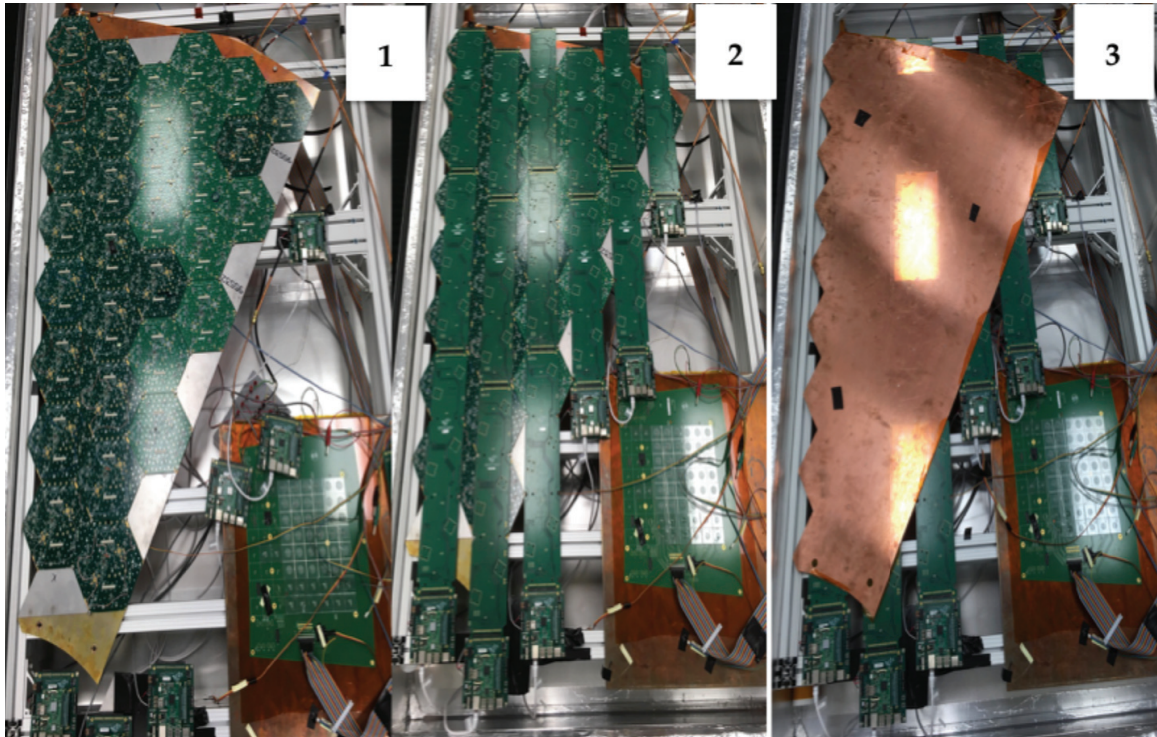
HGCAL cassette assembly in a cold box. Modules populated on a cooling plate (1), motherboard connected to the module (2), cover plate on top making a complete cassette (3).
